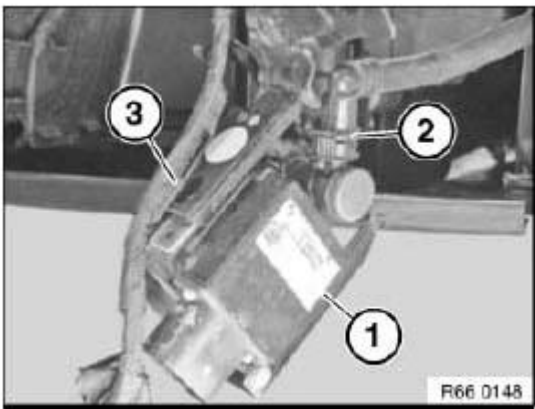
Identifying Night Vision Camera, Hose Connection And Cable Fastener
